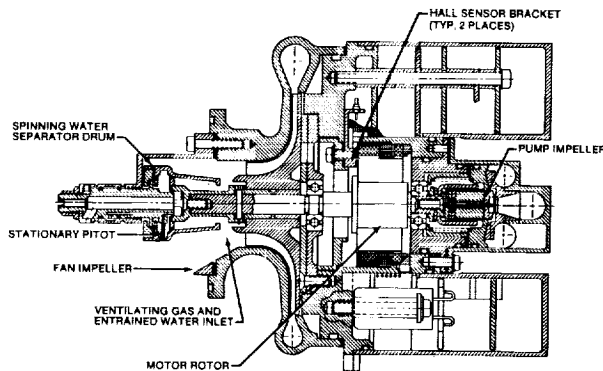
FAN/PUMP/SEPARATOR ASSEMBLY.
